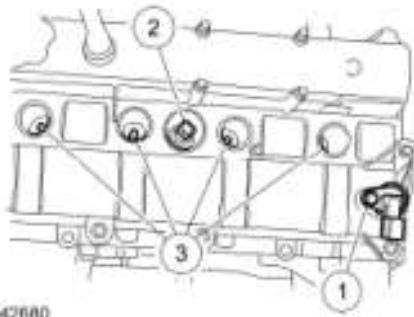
Identifying Crankshaft Position Sensor, Cylinder Head Temperature Sensor And Spark Plugs
